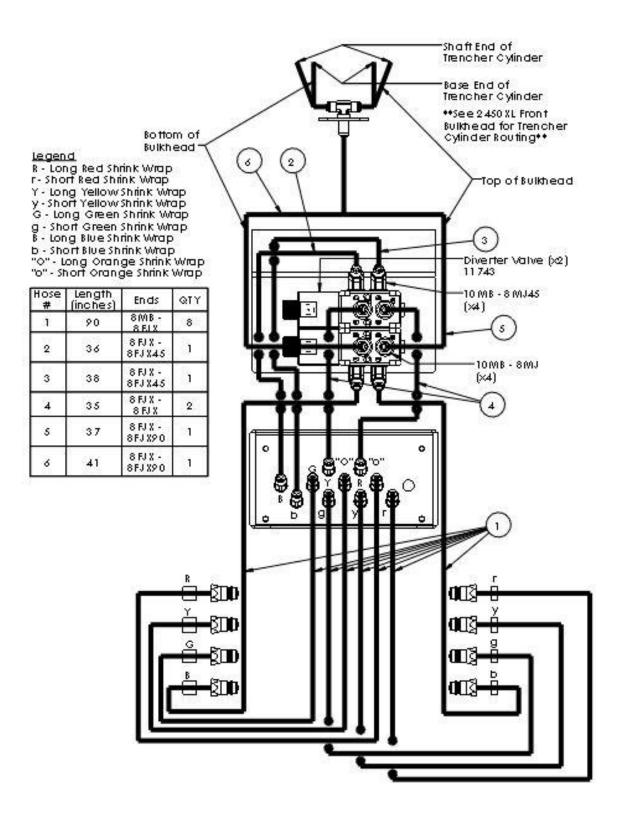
Pulldozer Transformer 1870XL 4 Remote kit
